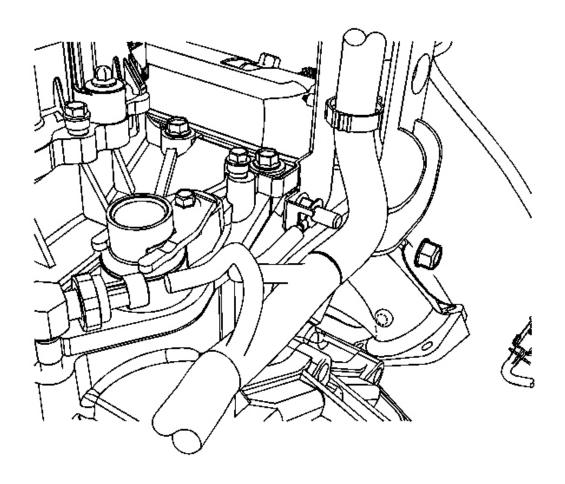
Engine Wiring Harness Ground Nut Courtesy of GENERAL MOTORS CORP.
